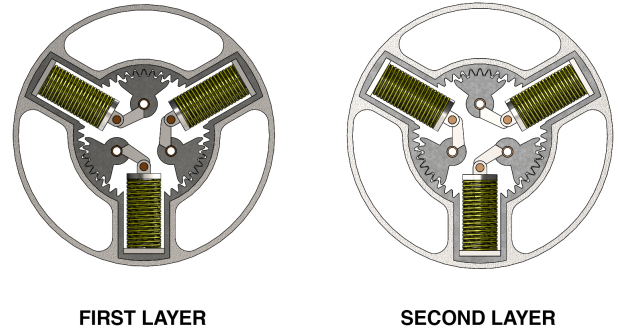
TWO LAYER SPRING CONFIGURATIONS
